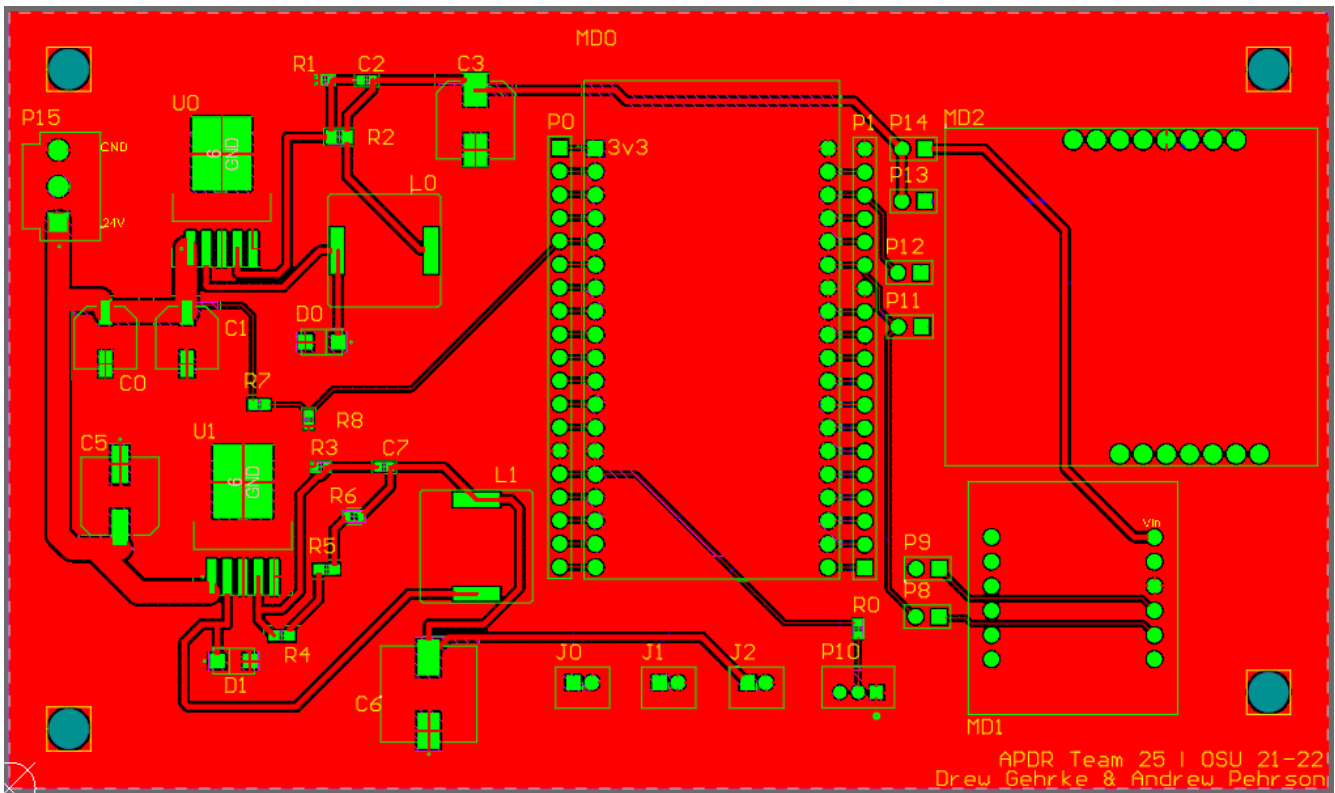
APDR PCB designed by Drew Gehrke and Andrew Pehrson
